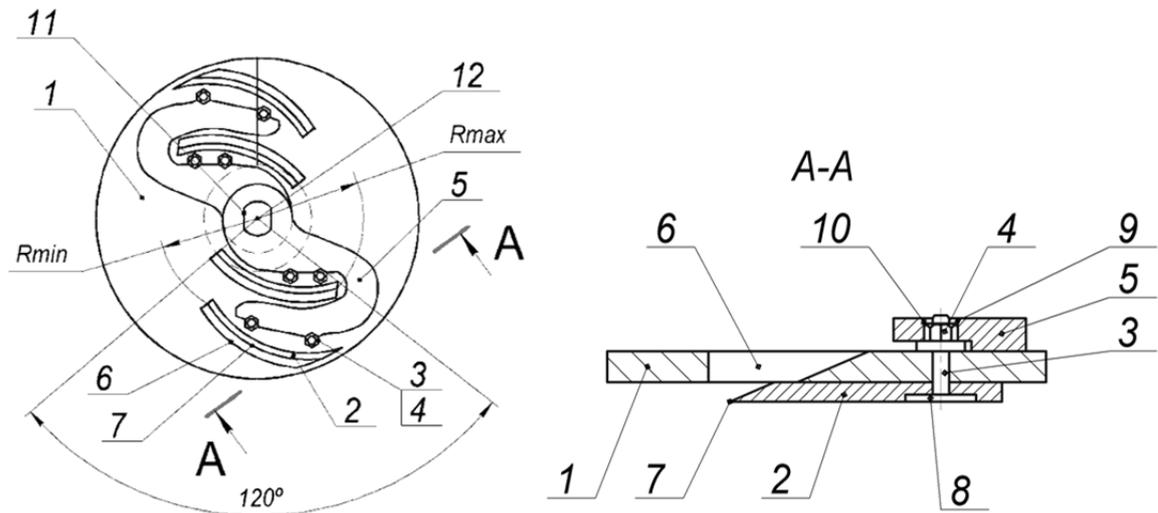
Knife for structural sausage products: 1 – body; 2 – blade; 3 – bearing assembly; 4 – nut; 5 – lock; 6 – groove; 7 – cutting edge; 8 – bearing plate; 9, 10 – washers.
